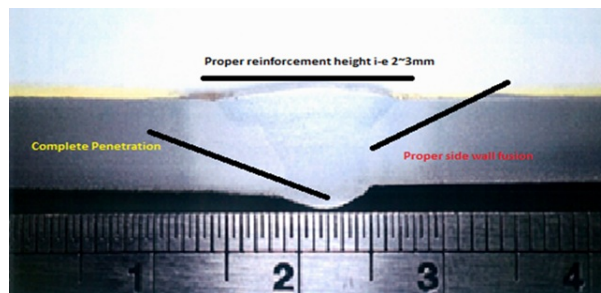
Macrograph examination of the final weld (GTAW)
